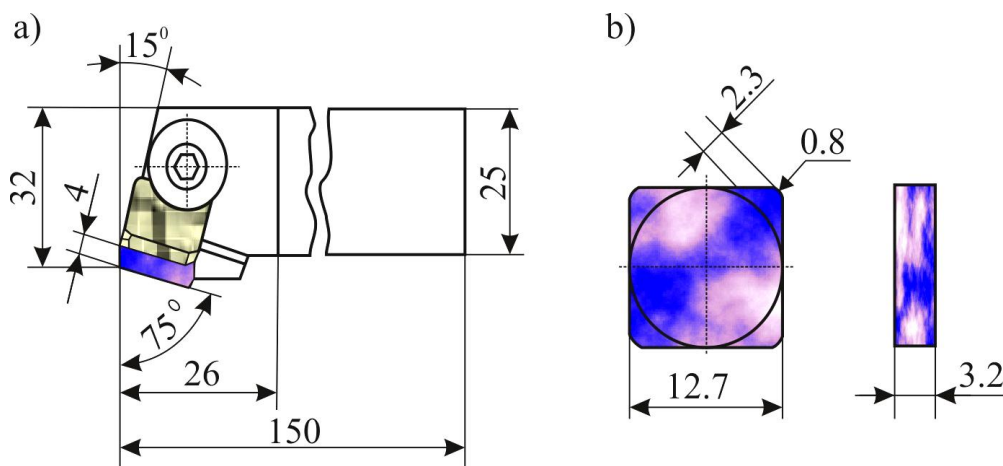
Cutting tool geometry: a) top view; b) cutting insert
